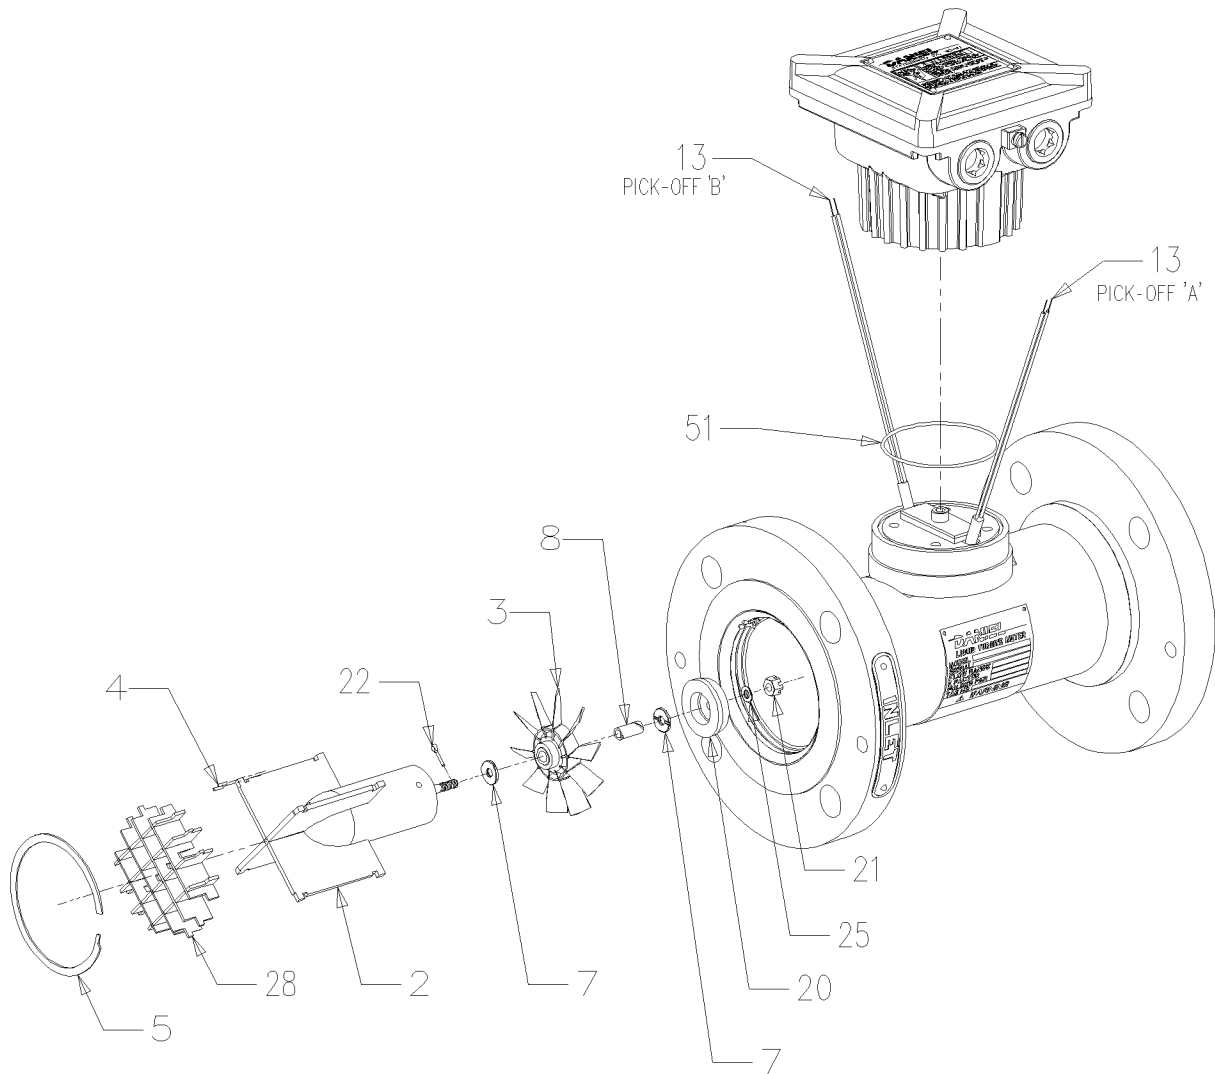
Meter Assembly - Sizes 3" and 4" (Reference Table 7-2)
